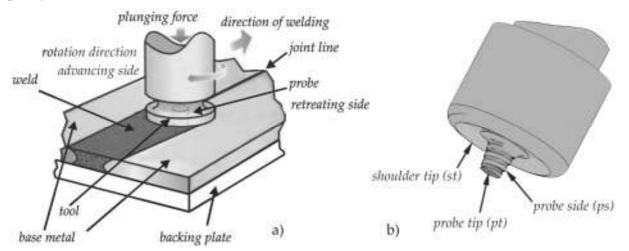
Friction stir welding: a) principle of the FSW, b) welding tool and its active surfaces [2]
